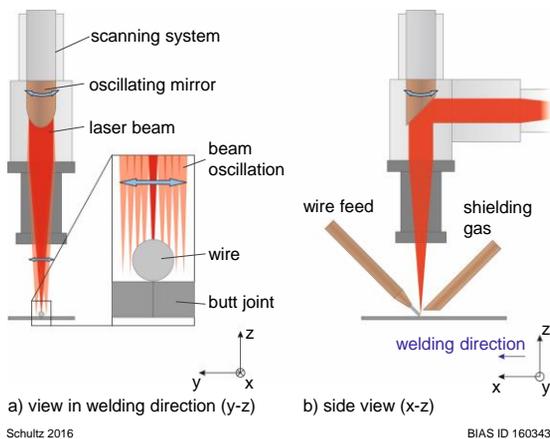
Schematic illustration of the beam path through the welding head and oscillation transverse to the welding direction
